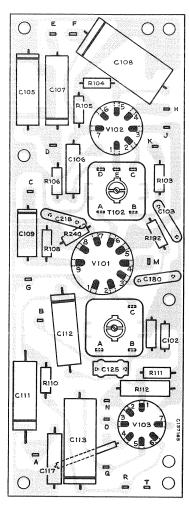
PC101 Sound I-F and Audio Assembly Layout
